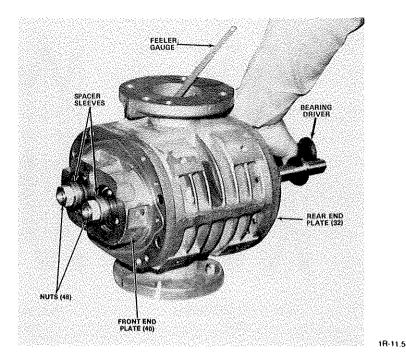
Installing a Bearing in the Rear End Plate (WA-250 pump model shown).
